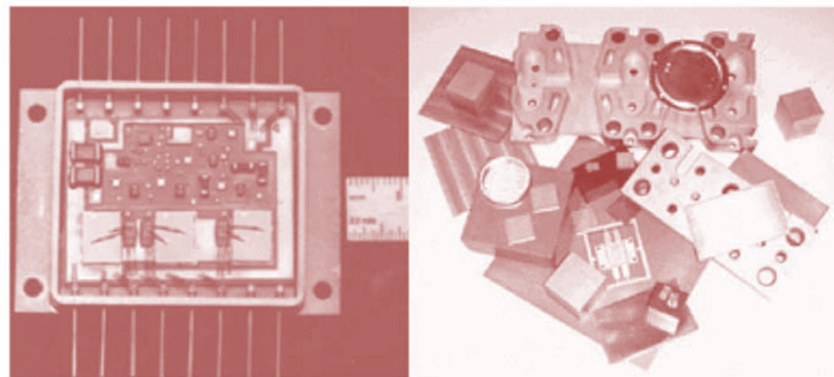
Discontinuously reinforced aluminium MMCs for electronic packaging applications: (a-left) SiCp/Al electronic package for a remote power controller (photo courtesy of Lockheed Martin Corporation), and (b-right) cast Grp/Al components (photo courtesy of MMCC, Inc.)
